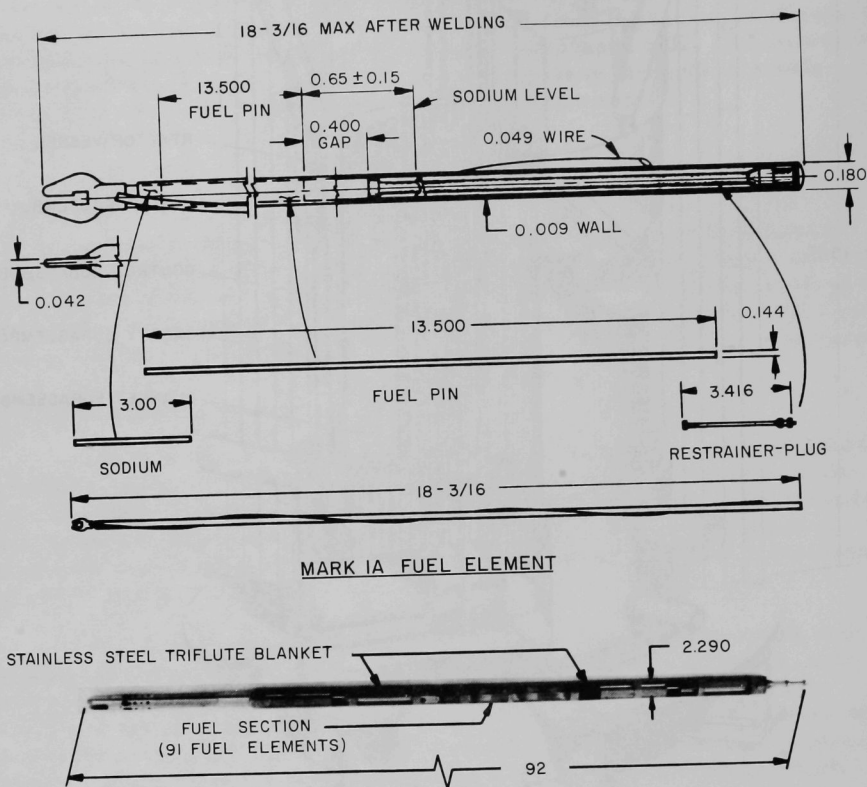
EBR-II Mark-IA Fuel Element and Subassembly (all dimensions in inches). ANL Neg. No. 103-J5808 Rev. 1.
